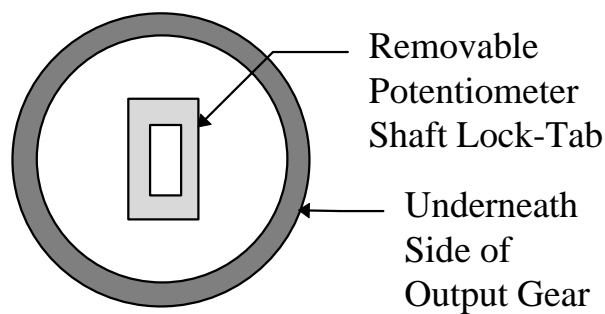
Illustration of the potentiometer shaft lock-tab inside the output gear.
